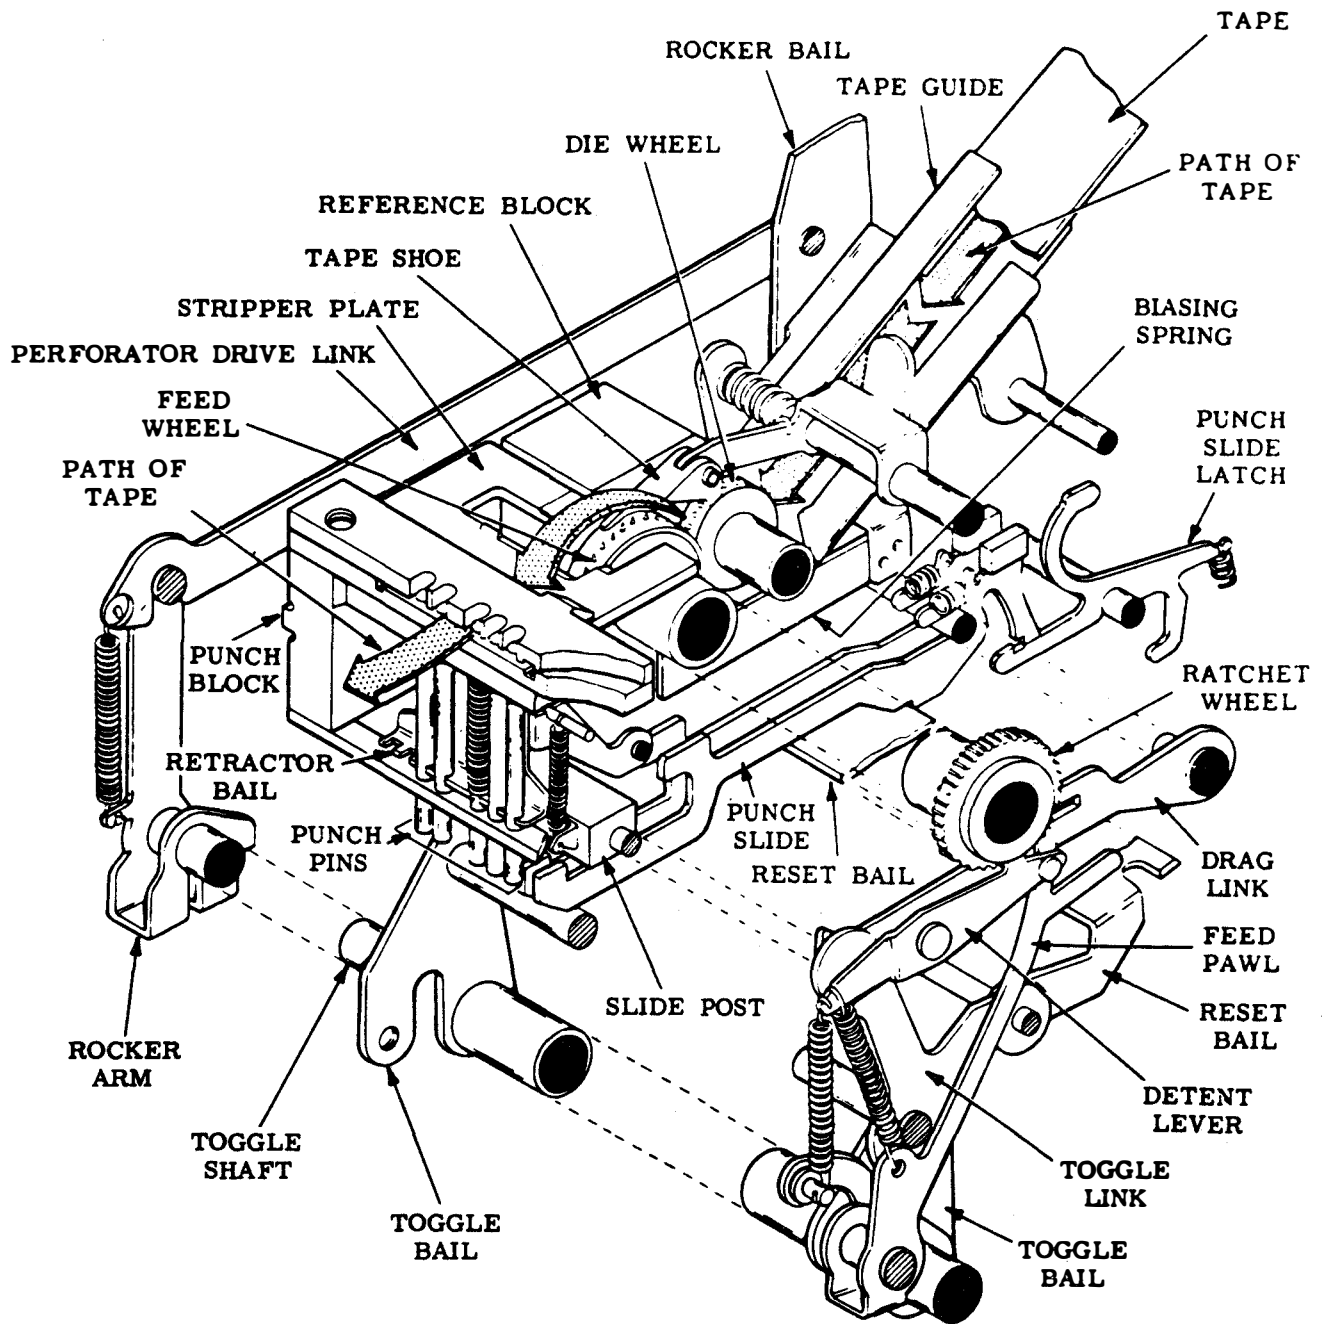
Perforating Mechanism - Chadless Tape Unit
